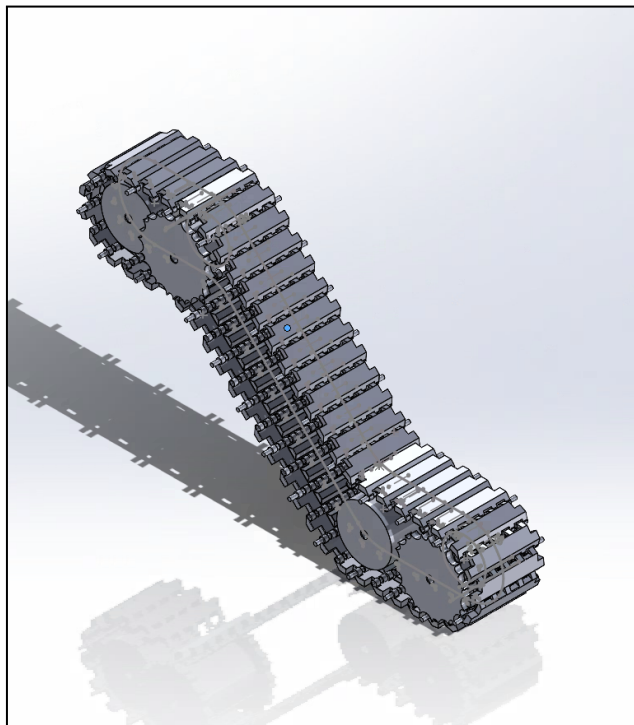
diagram displaying supports of conveyor belt as well as conveyor belt on the inside
